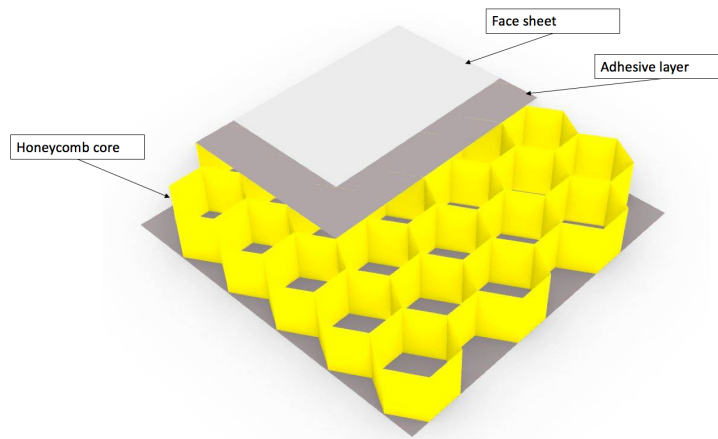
The shape of the honeycomb core. On top and bottom of the core the face sheet is placed with an adhesive layer in between.
